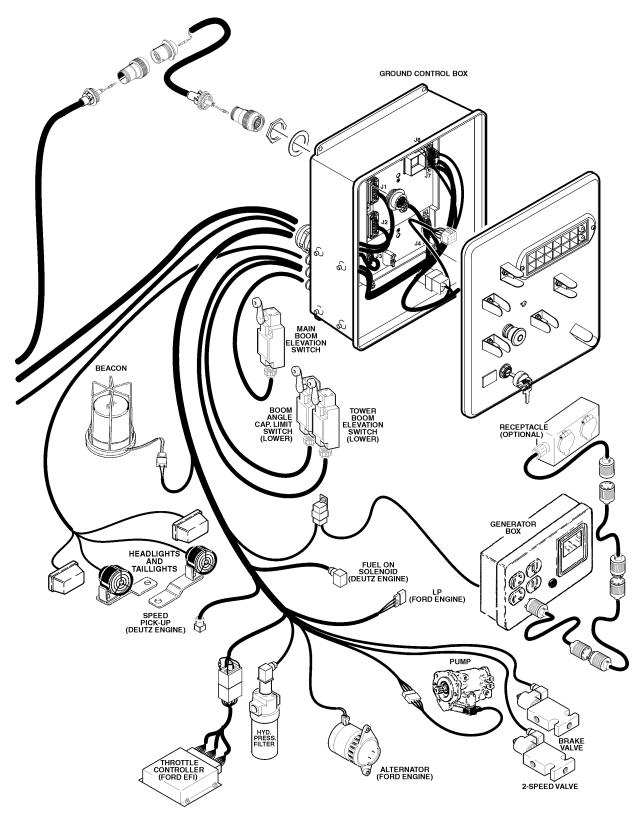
Electrical Harness - A Models (S/N 64249 to S/N 64270) - Sheet 2 of 2
